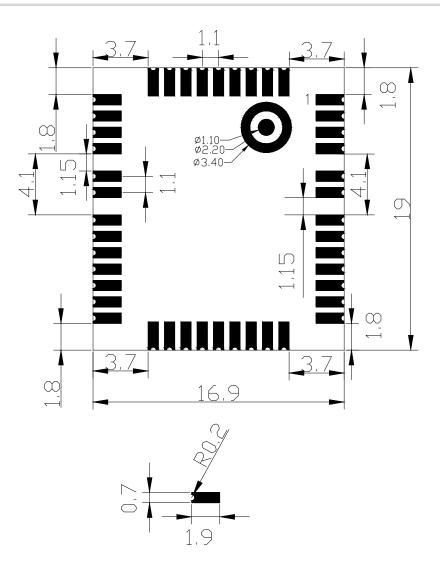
GC10 Module Bottom Dimensions (Unit: mm)
